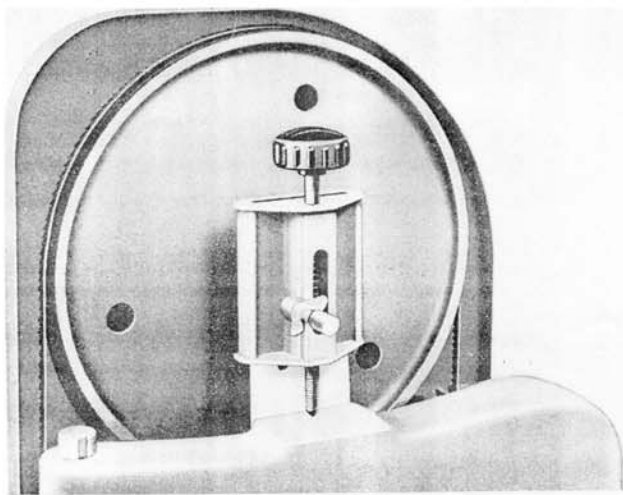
Rear of Upper Wheel, Showing Blade Tension and Tracking Adjustments.
